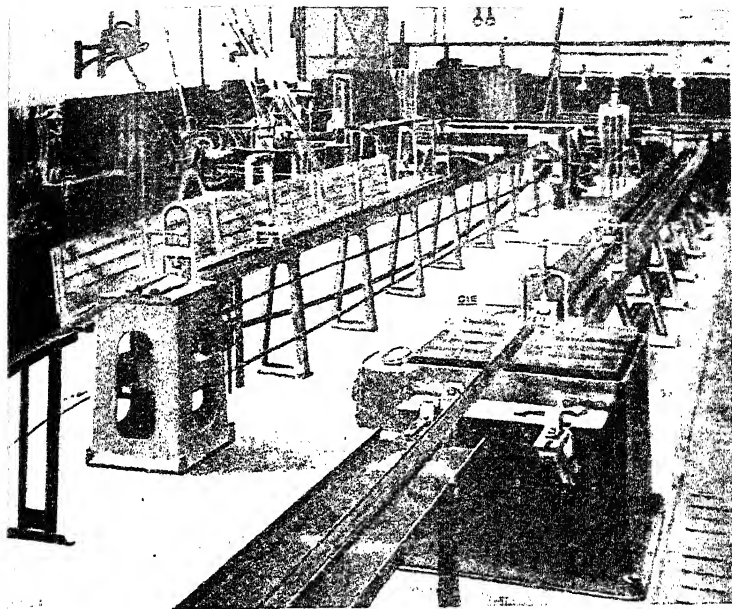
STRIP DRAW BENCHES AT THE BRISTOL WORKS
